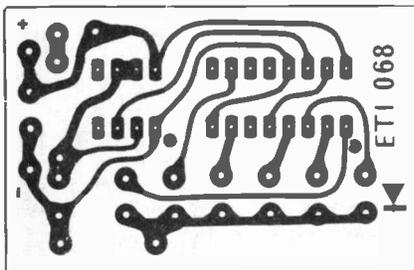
Printed-circuit board layout for the LED dice. Full size 55mm x 35mm.
